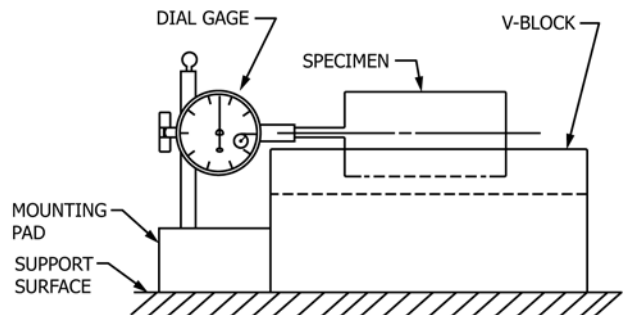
Assembly for Determining the Flatness and Perpendicularity of End Surfaces to the Specimen Axis (FP1)
